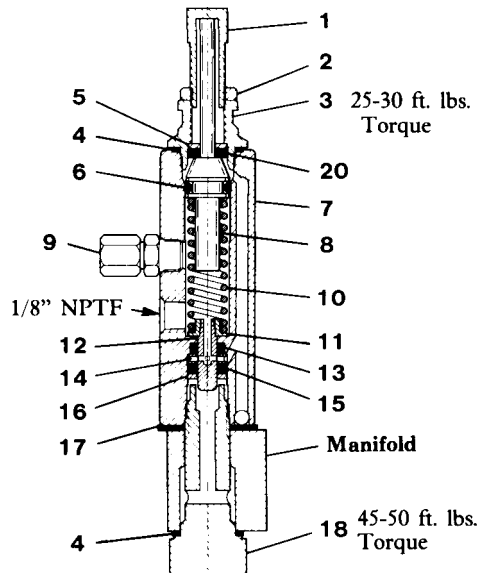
A. INJECTOR (MANIFOLD TYPE)
